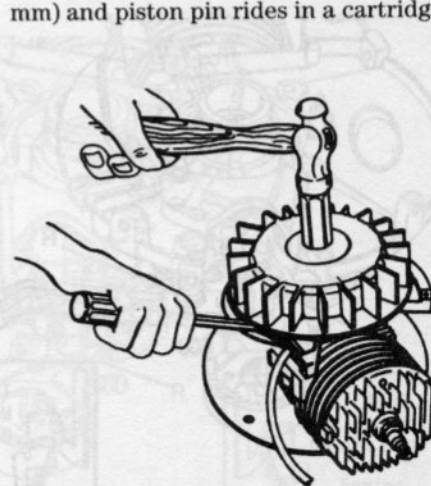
View showing use of a knock-off tool (nut) to separate flywheel from crankshaft end.
